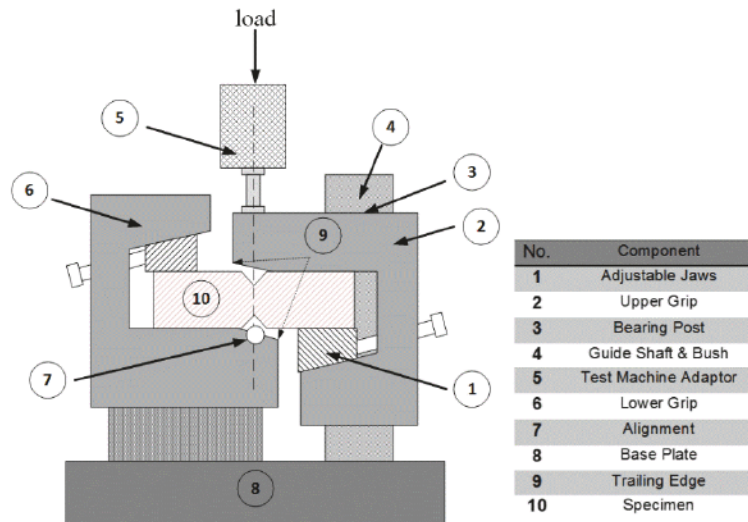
ordinary configuration of Iosipescu shear test fixture
